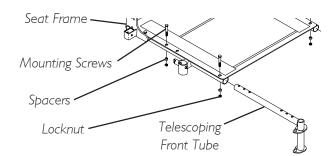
ADJUSTING/REPLACING TELESCOPING FRONT RIGGING SUPPORT
